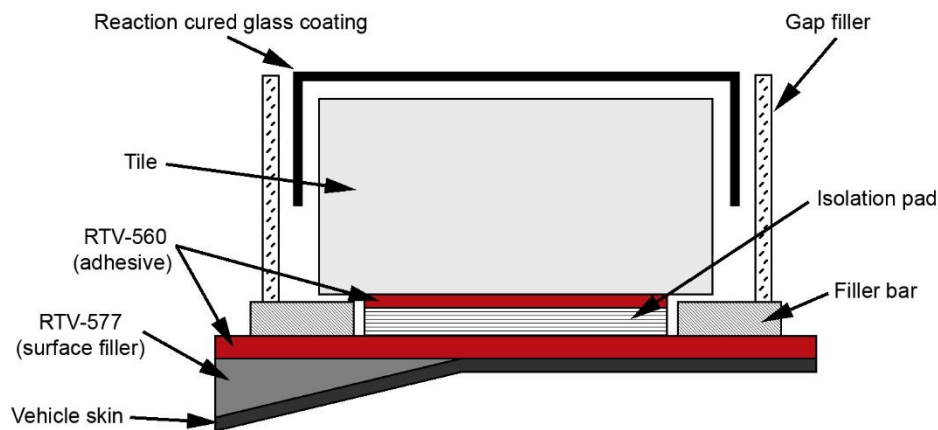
Schematic drawing of the heat tile bonded assembly on the Space Shuttle
